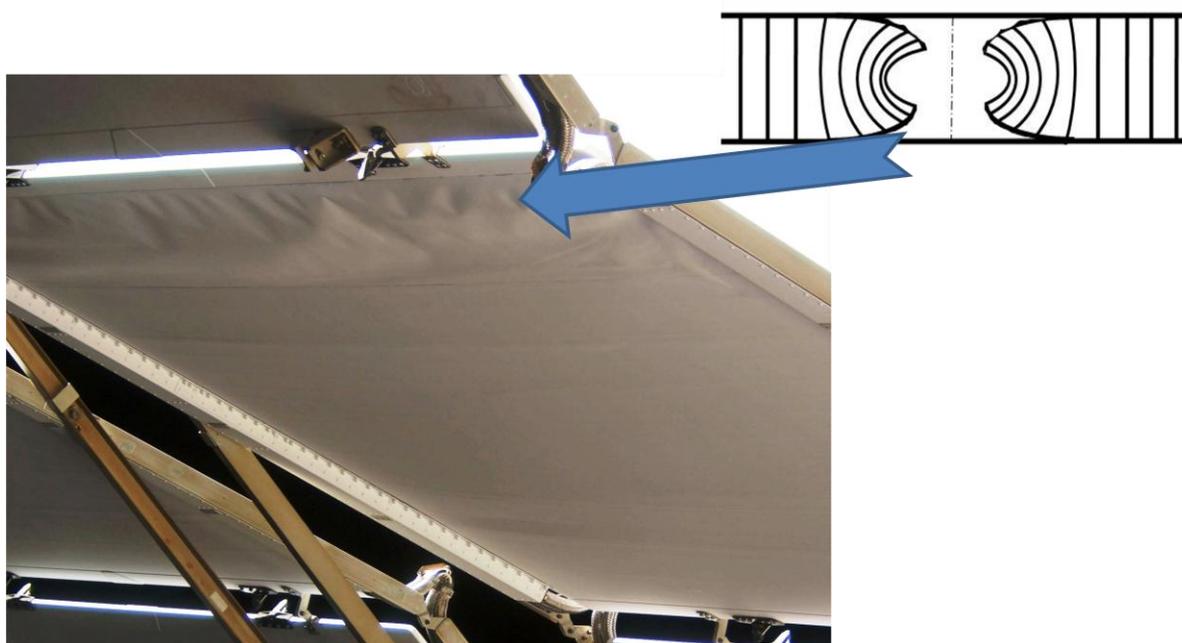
HOBE Bond Failures from the Face Sheet
